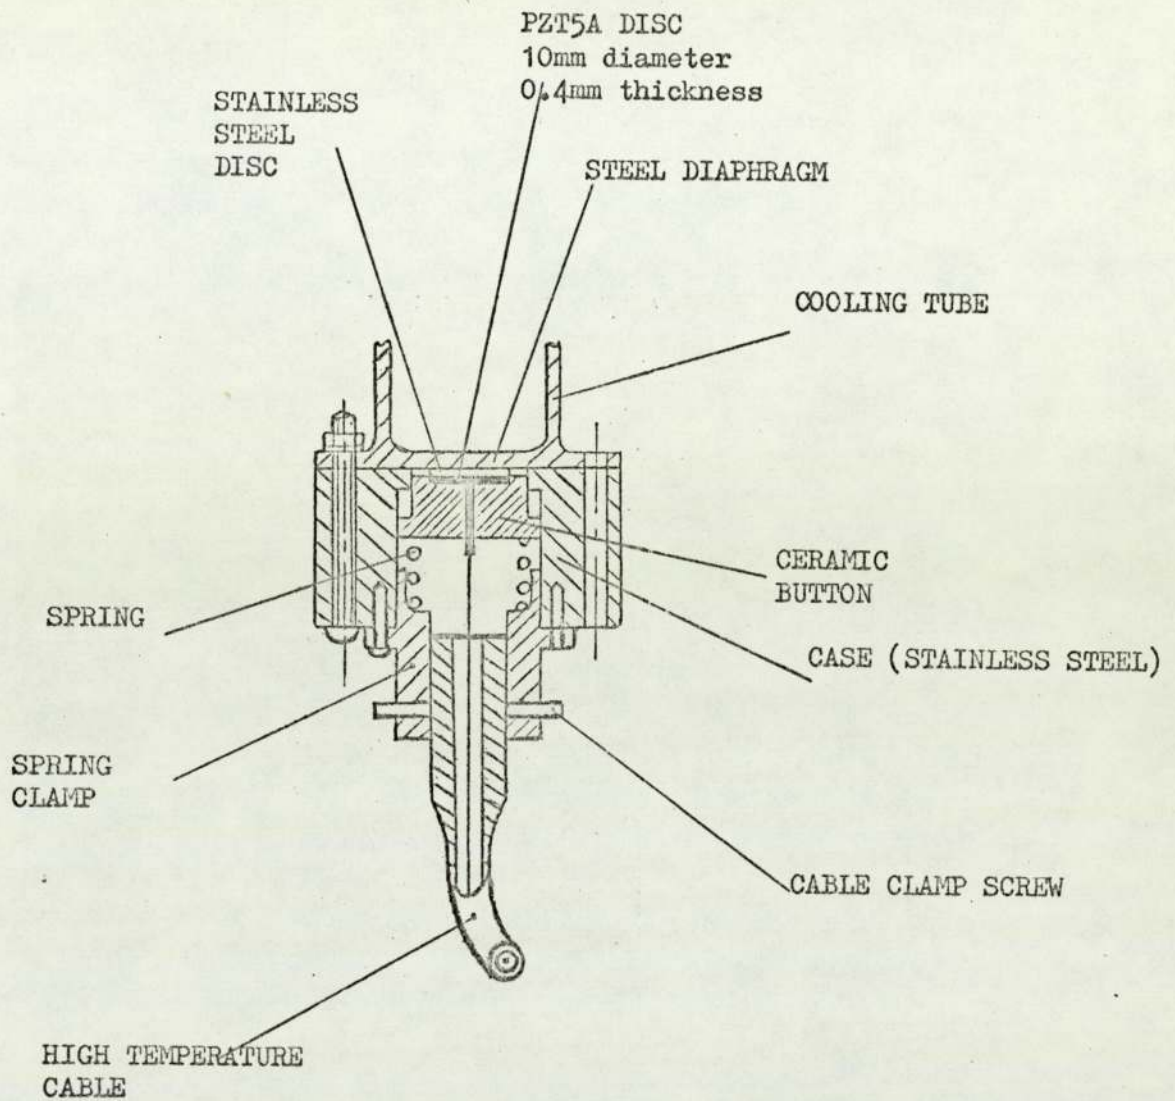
Construction of the transducer probe mounted on the cooling tube of the sodium pool.
